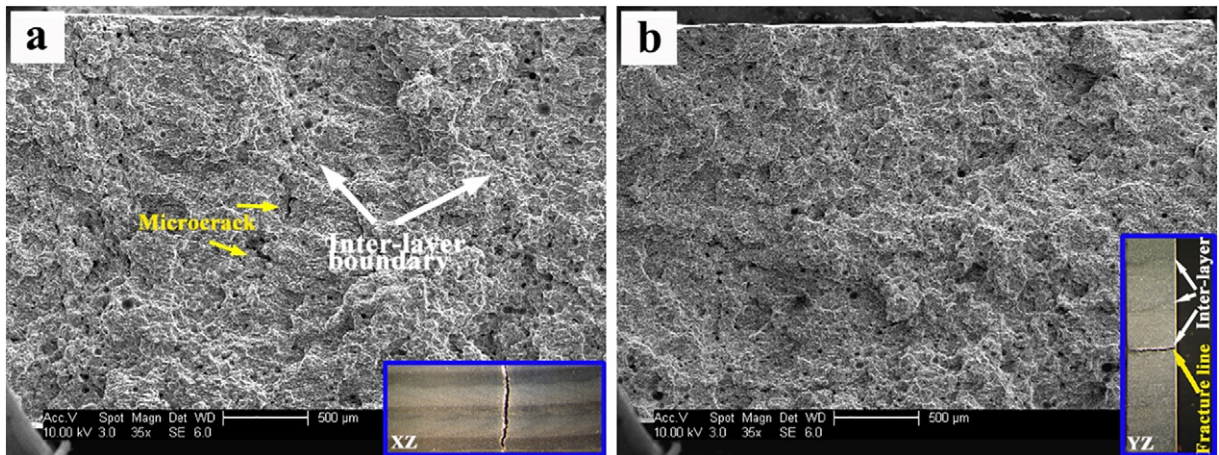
Side-view and fractographic morphology of fractured tensile samples for as-deposited alloy with loading direction in (a) horizontal and (b) vertical.
